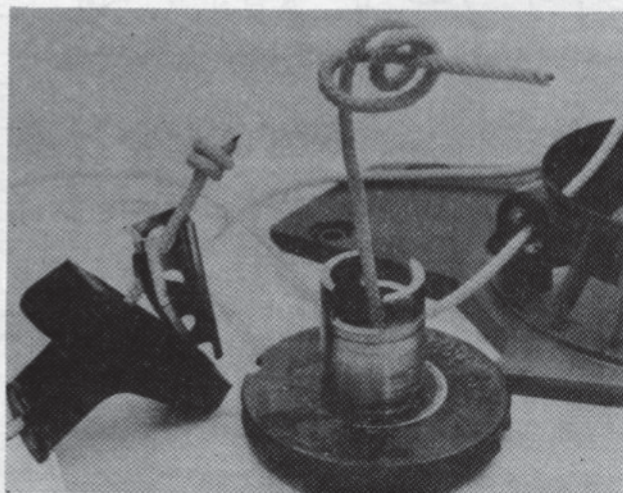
When installing new starter rope, knot ends as shown. Seal rope holes in pulley and coat knots with Duxseal (Homelite part No. 24382)
